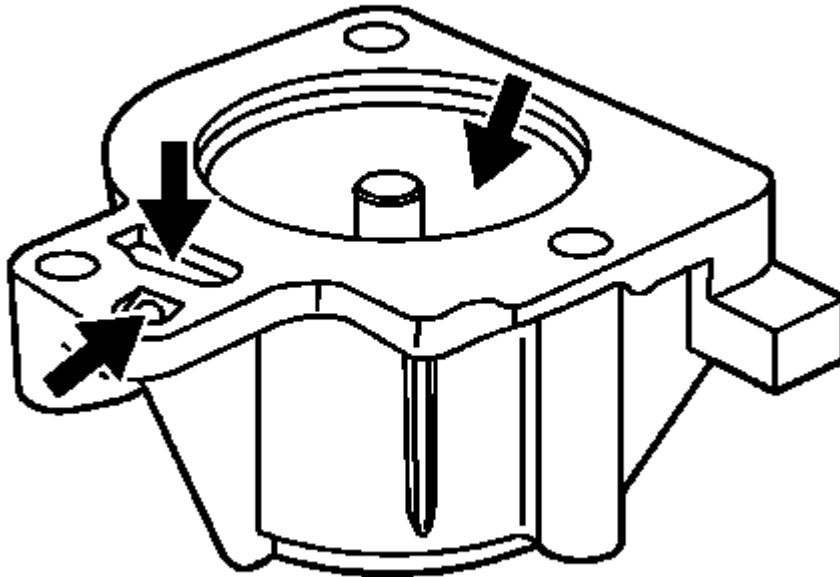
Intermediate Clutch Roller Retainer Retaining Ring
